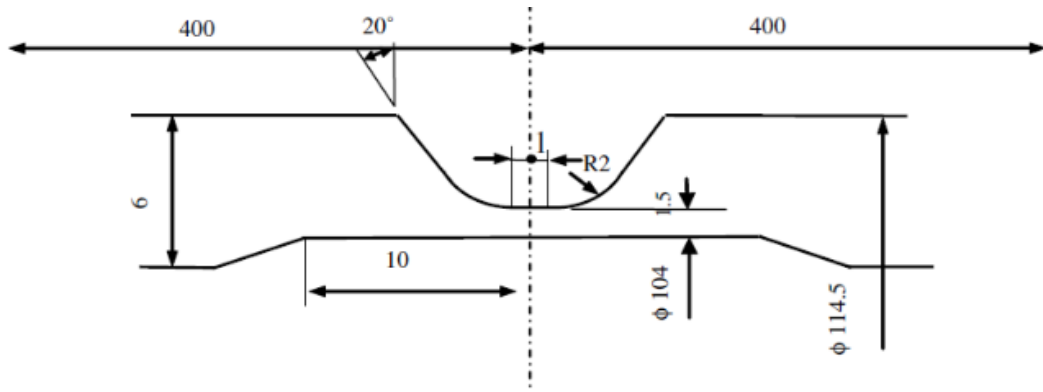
Geometric dimensions of the desired pipe and weld line [4].
